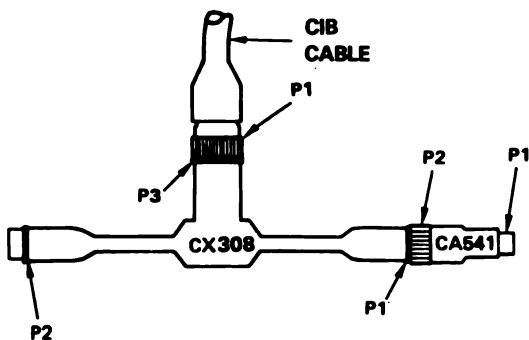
STE Turret Cable Hookup To DBA And Adapter CA541
